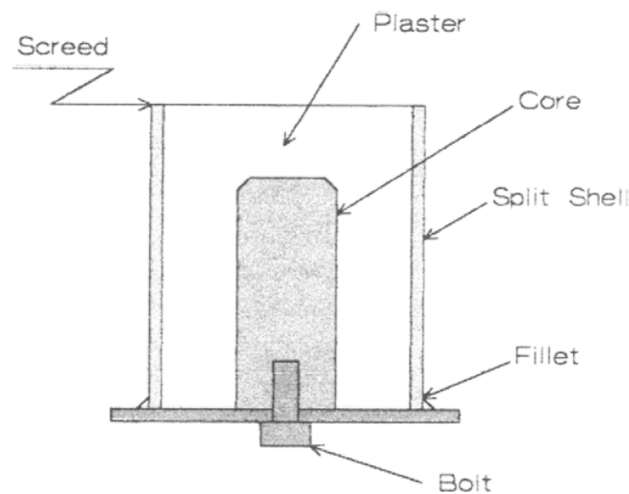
Master mould: cylindrical plaster former for casting a crucible shape
